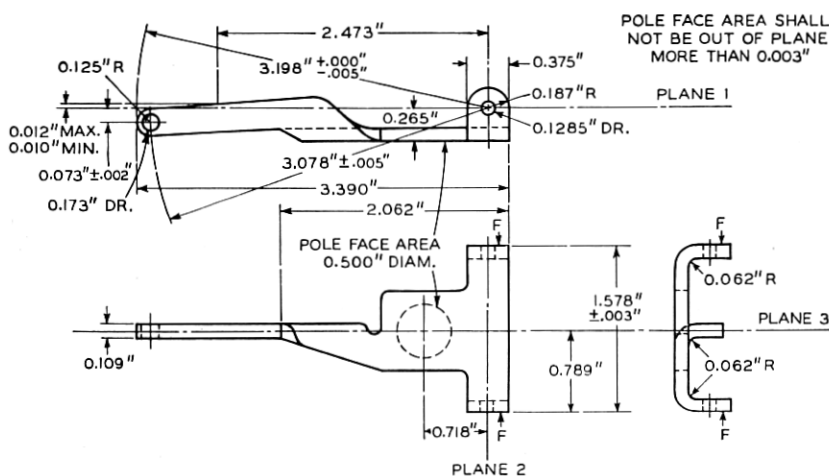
Functional datum plane dimensioning of magnetic armature type of part
